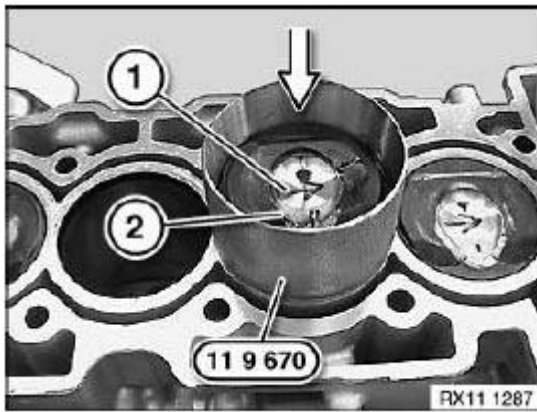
Inserting Piston With Connecting Rod In Cylinder
